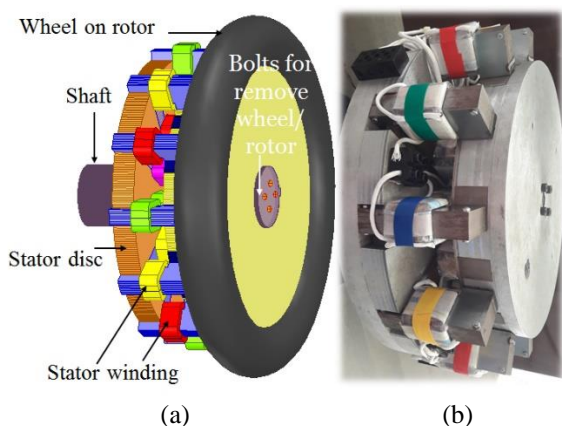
Complete (a) view of C-core RFSRM with removable wheel/rotor arrangement. (b) Proto type hardware arrangement of C-core RFSRM.
